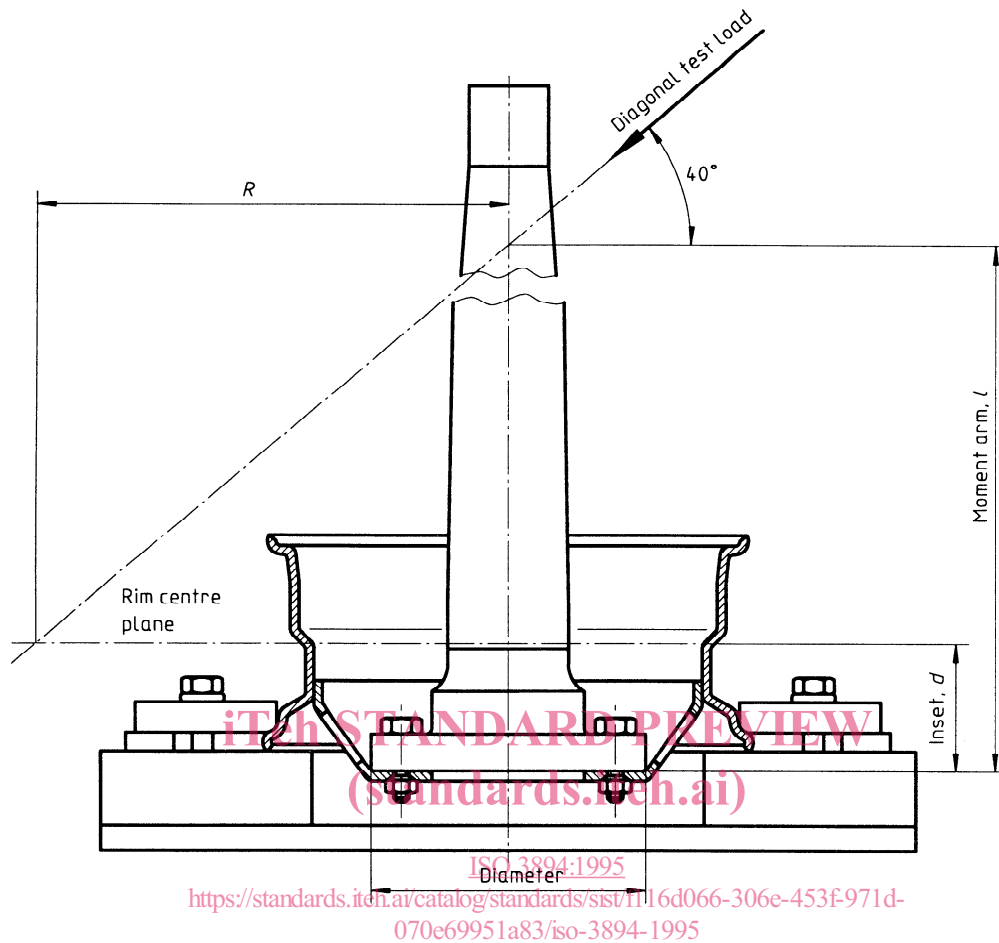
Dynamic cornering fatigue test — 40° loading method
